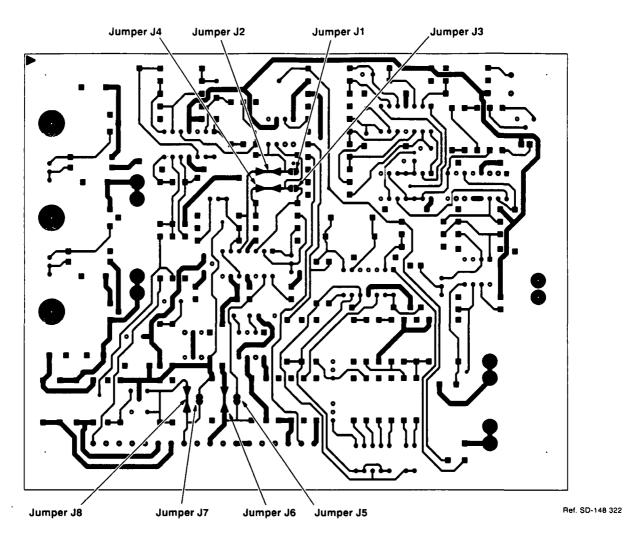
Jumper Locations On Voltage Control Board PC1
